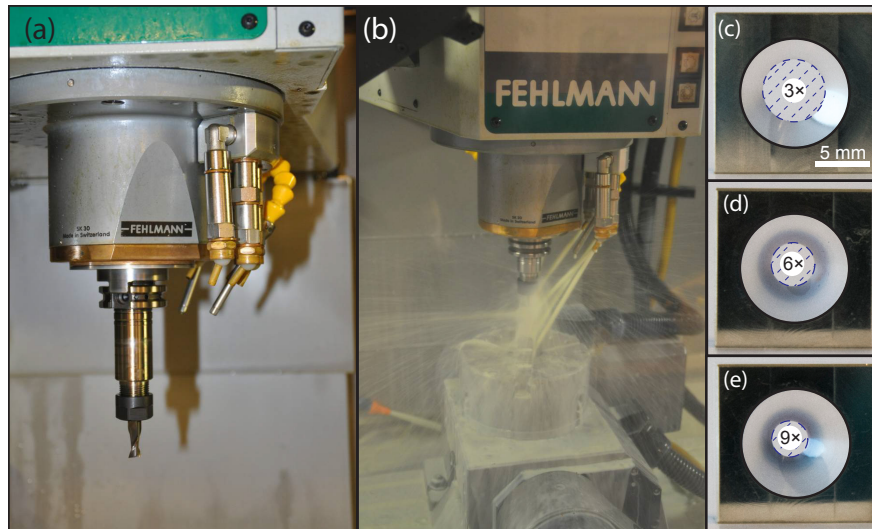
(a) Close-up of the milling head inside the milling cutter machine. (b) Milling process of the external light trap. The aluminum rod that will become the concentrator is fixed in the setup. Various bits are used for the different fabrication stages of the concentrator. A beam of cooling liquid is used to carry away heat generated during the milling and to remove the released metal chips during the milling. (c-e) Top view of the concentrators with different concentration factor ($C=3-9\times$).
